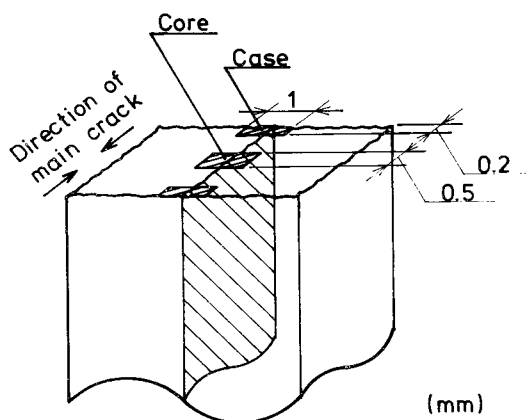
Positions for fracture surface observation and measurement of apparent porosity in projected fracture surface, and sectioning of specimens for micro-crack observation.
